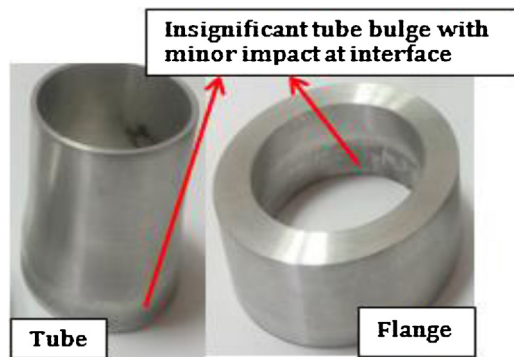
50 mm diameter, 1.5 mm thick tube with 2 mm stand-off distance.
